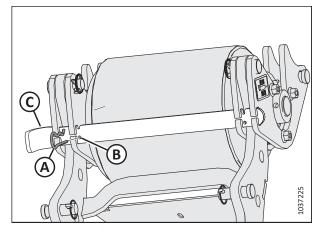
Left Gauge Roller in Storage Position – View from Below
